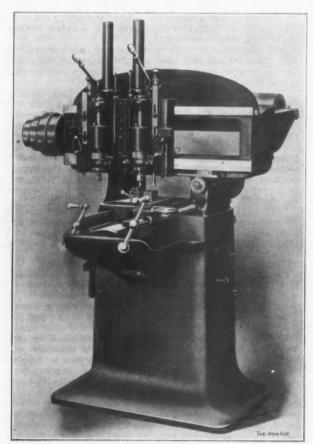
The No. 11 Two-Spindle Profiling Machine with Belt Drive, Built by the Pratt & Whitney Company, Hartford, Conn.
